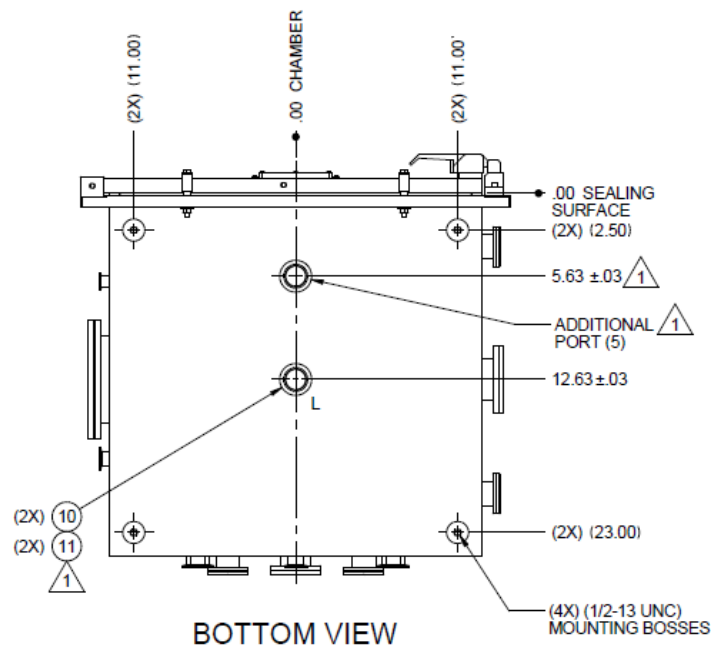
Bottom view of vacuum chamber with two KF 40 flanges for liquid water return.
